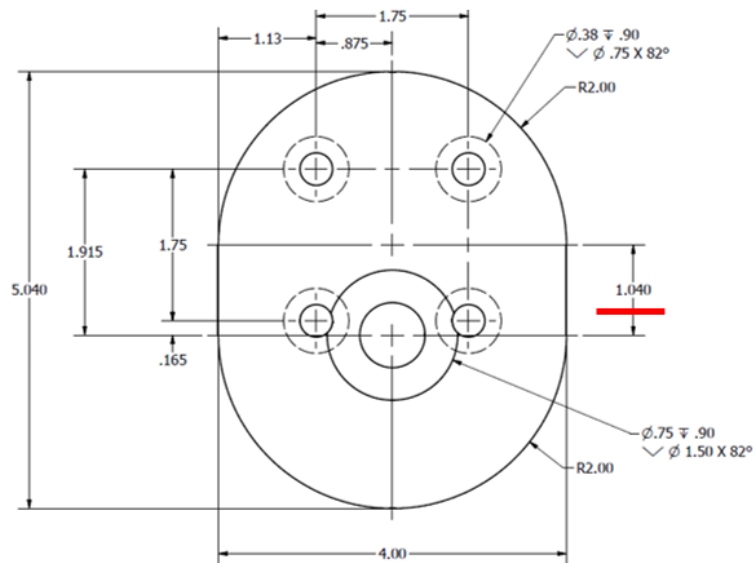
Adapter Top Plate Dimensions, Highlighting the Offset Dimension
